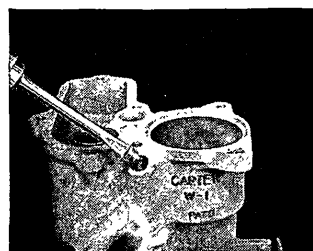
Install pump jet and pump jet plug. Be sure jet is
